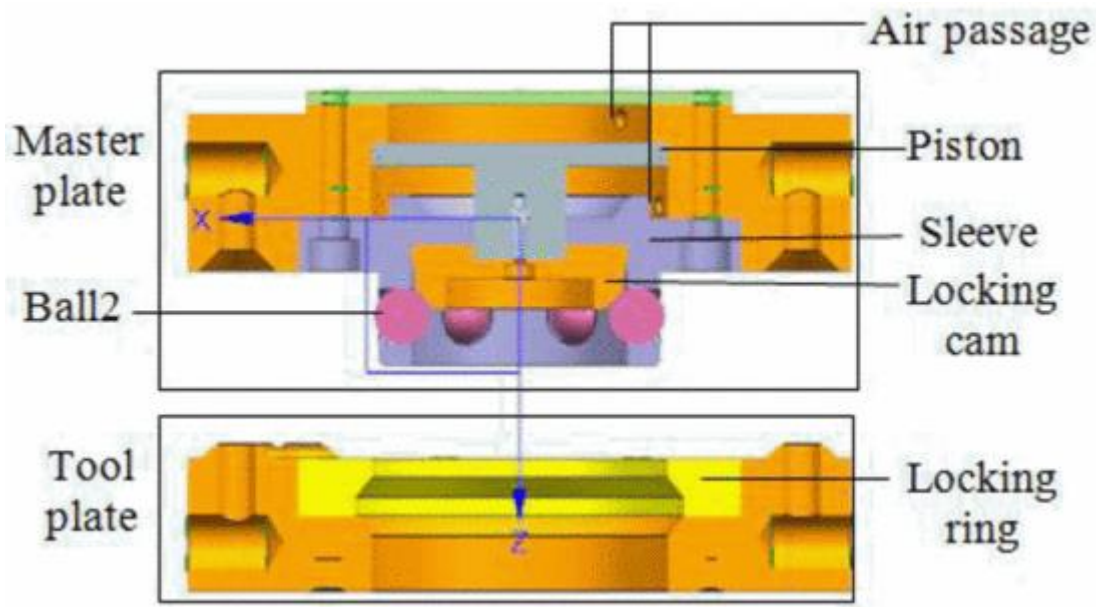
Master and tool plate for tool changing system (Li et al, 2016, pp. 13-17)
